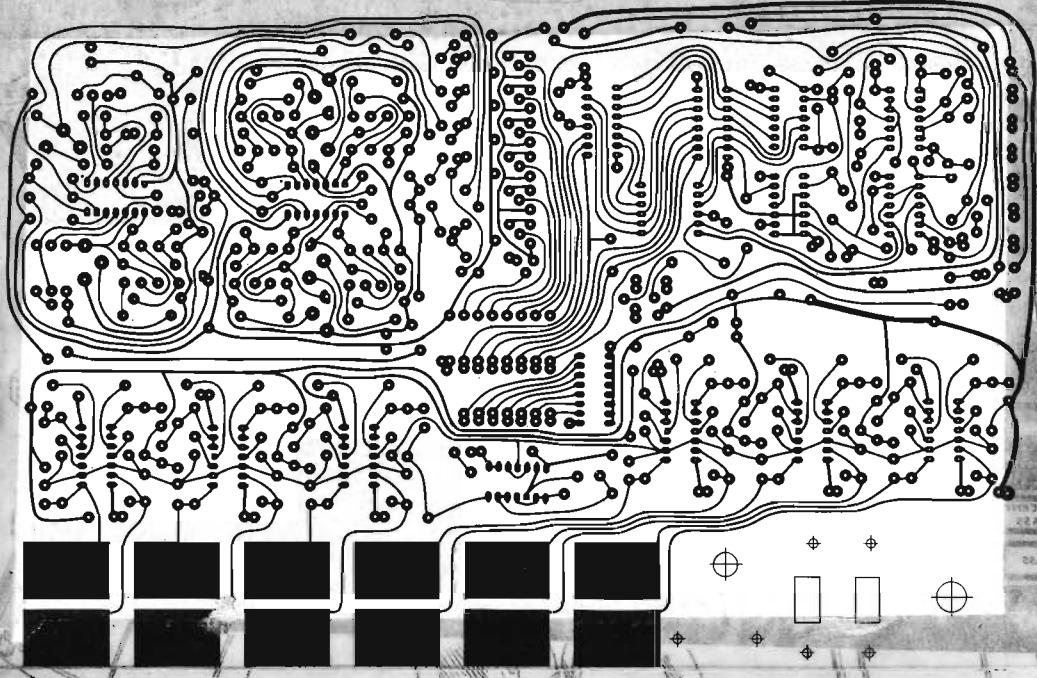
MAIN PC BOARD foil pattern shown half-size.
